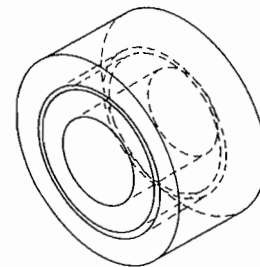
Perspective View of Stator for Magnetic Thrust Bearing.
